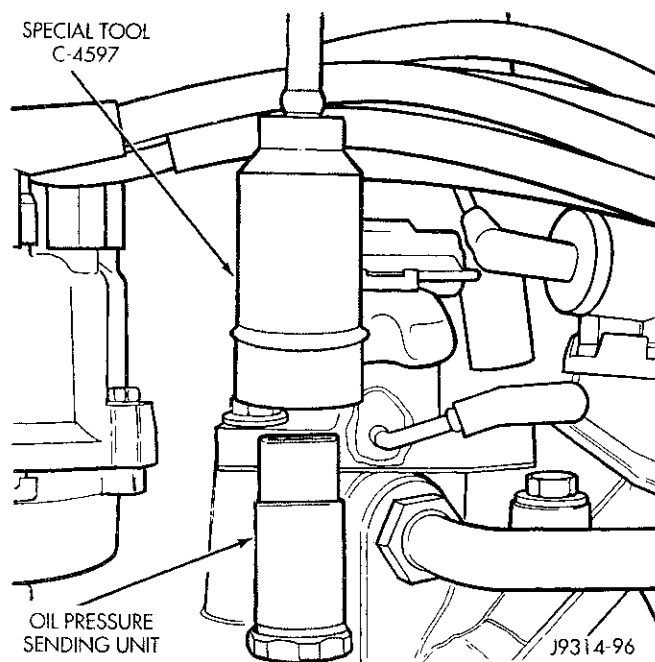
Oil Pressure Sending Unit—Removal/Installation
